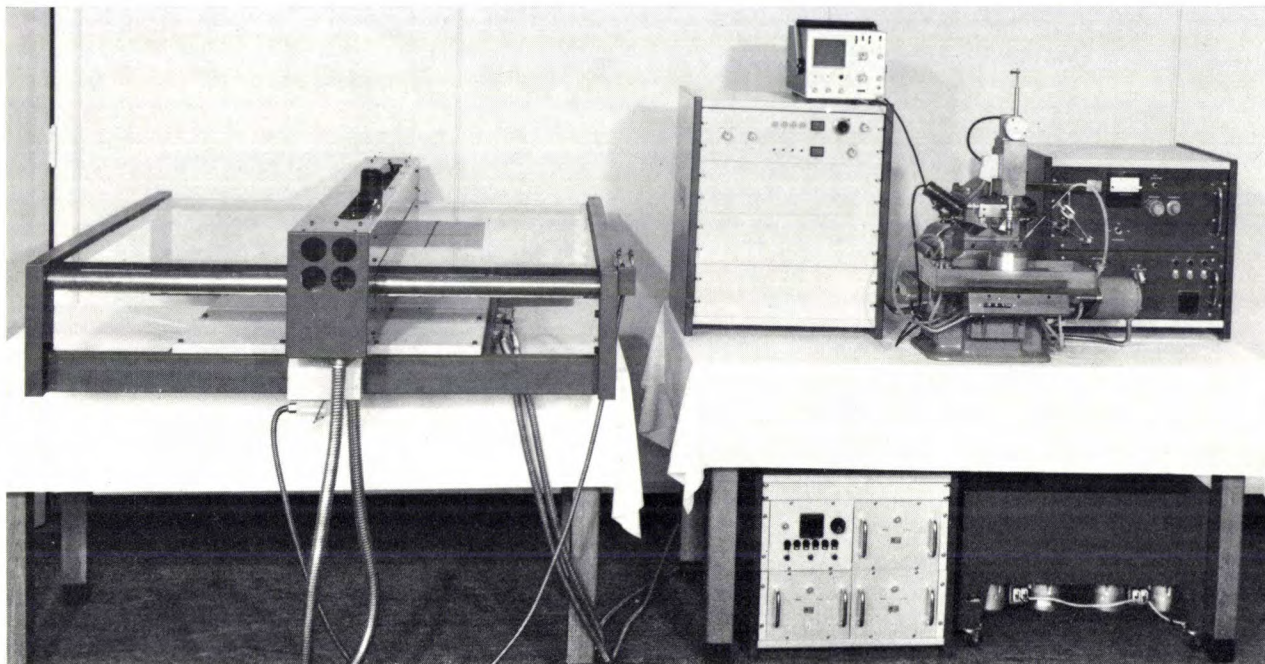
Contouring machine with automatic line-tracking system. A greatly enlarged contour drawing of the workpiece (e.g. 500 times full size) is placed on the table on the left; the contours of the drawing are traced out automatically and transferred to the control of the x - y carriage on which the workpiece is mounted. The associated electronic equipment is located under the high-speed spark machine and to the left of it; the unit on the right is the power supply.
